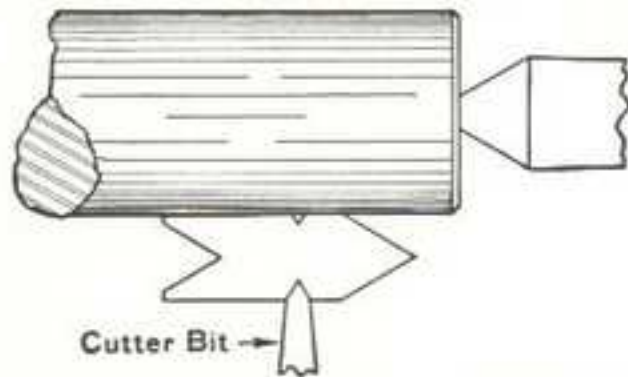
Cutter Bit Set Square With Work for Cutting External Screw Threads
